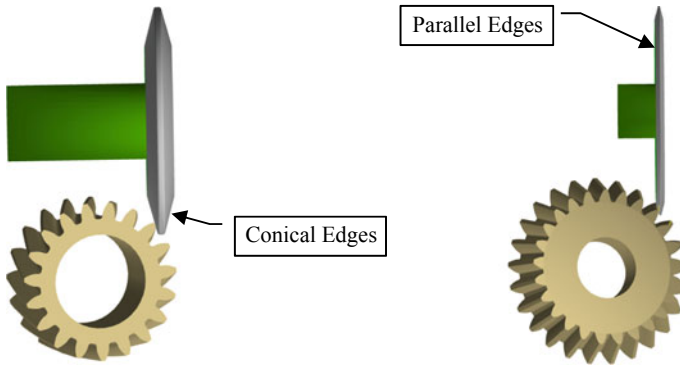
Helical and straight bevel gear Tip chamfering with a CoSIMT
